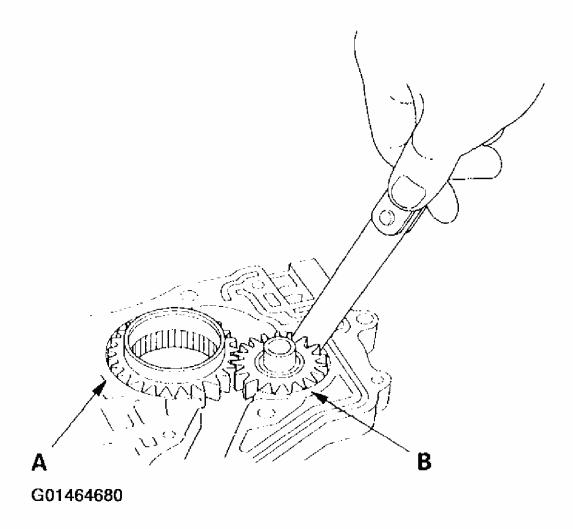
Measuring The Side Clearance Of The ATF Pump Drive Gear & Driven Gear
